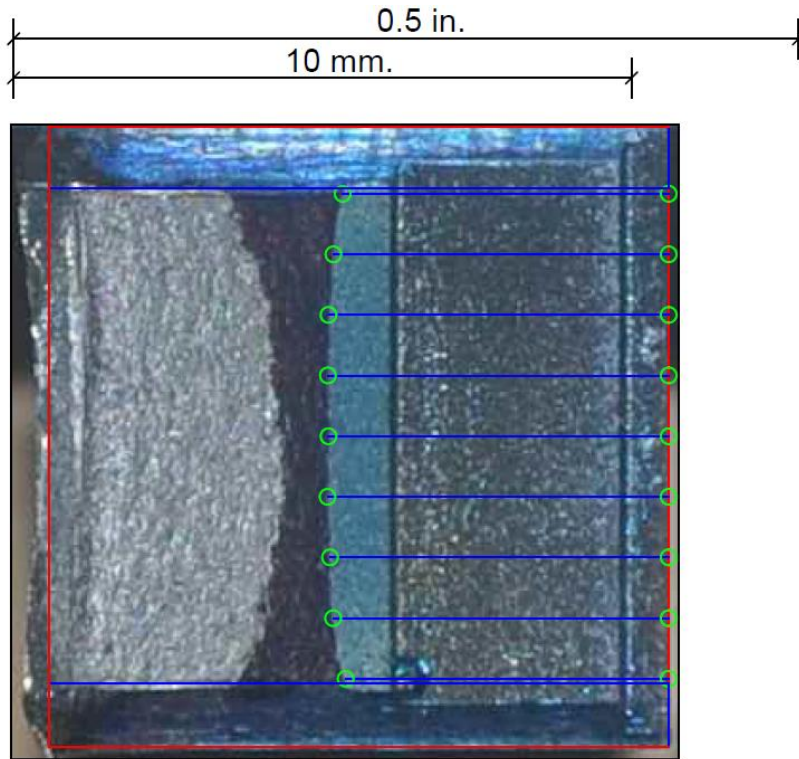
Specimen E15' Fracture Surface
